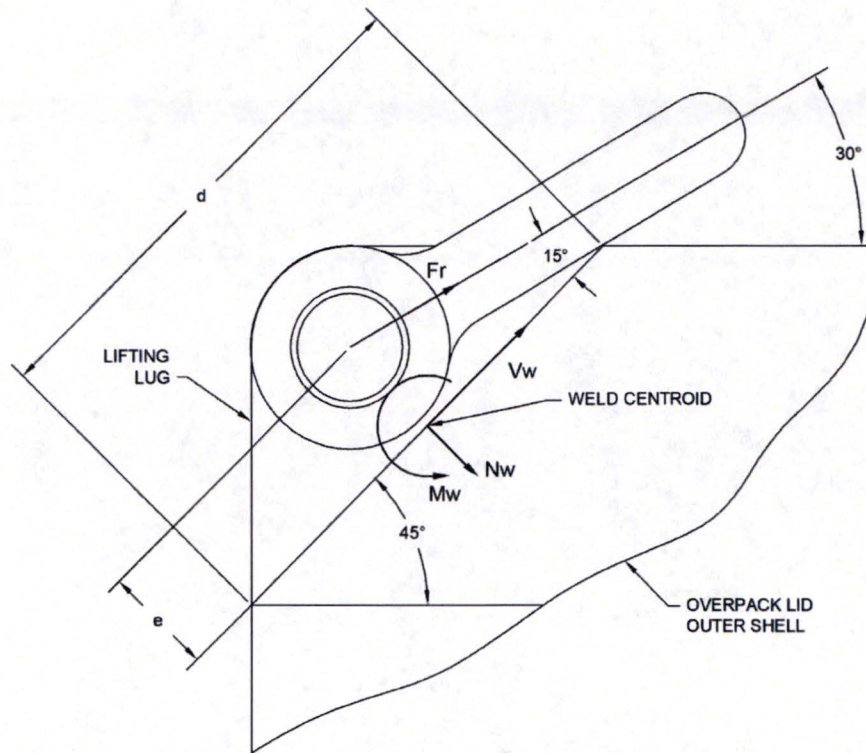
Overpack Lifting Lug Weld Lifting Loads
